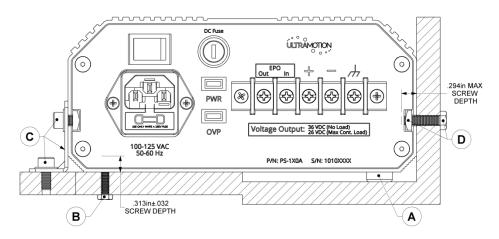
Diagram depicting all primary mounting options. (A) Surface placement with rubber feet, (B) Bottom Mount, (C) Bracket mount, and (D) Side Mount
